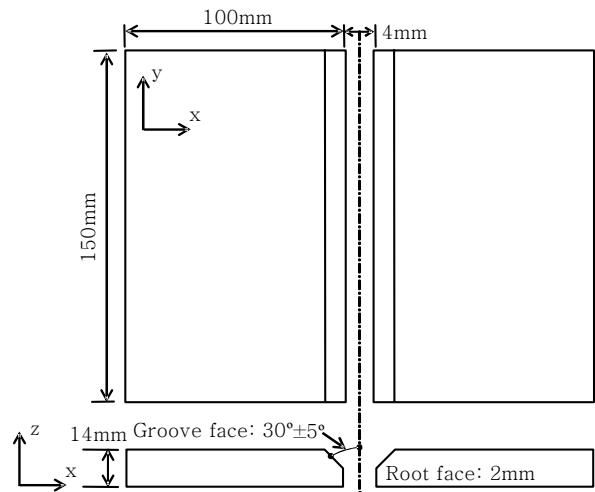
Weld plate showing dimension and location of the Temperature measurement
